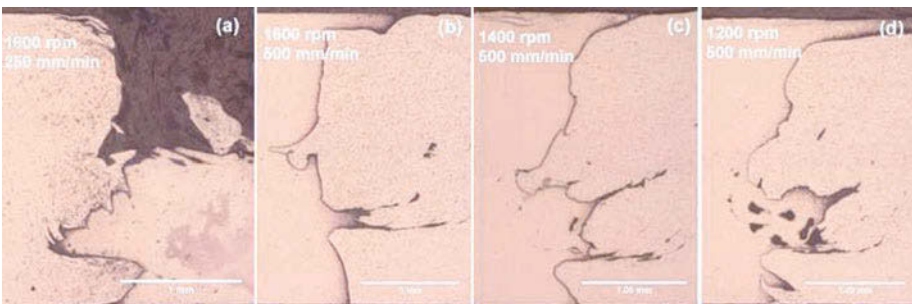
Cross section of weld zone performed using at: (a) 1600 rpm rotational speed and 250 mm/min welding speed (aluminum on the RS). (b-d) Constant welding speed of 500 mm/min and varying rotational speeds to 1600, 1400, 1200 rpm (aluminum on the AS).
